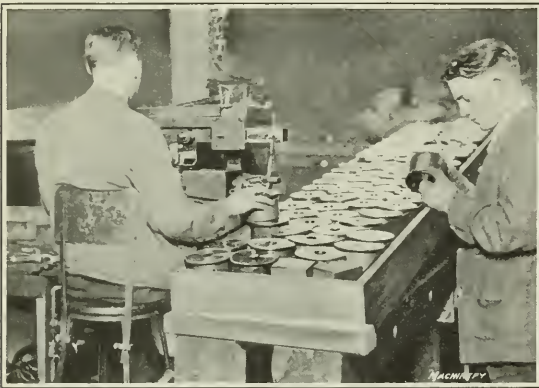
Stamping Head in Noble & Westbrook Stamping Machine—note Conveyor for bringing Cases from Inspector to Machine
